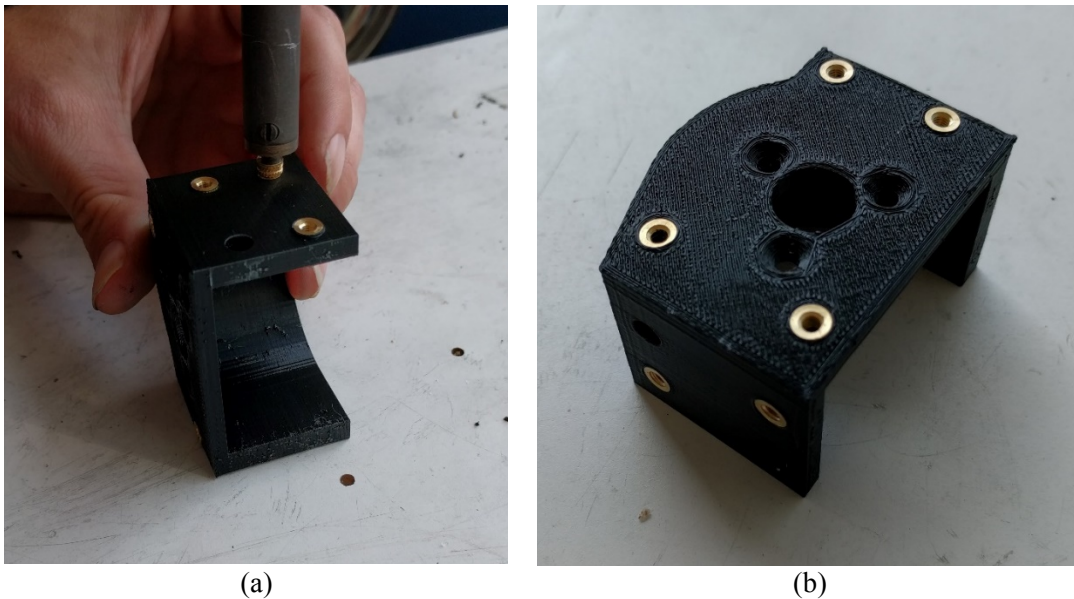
Heat setting threaded inserts into the motor housings using the soldering iron tip (a). A motor housing with most of the inserts in place (b).
